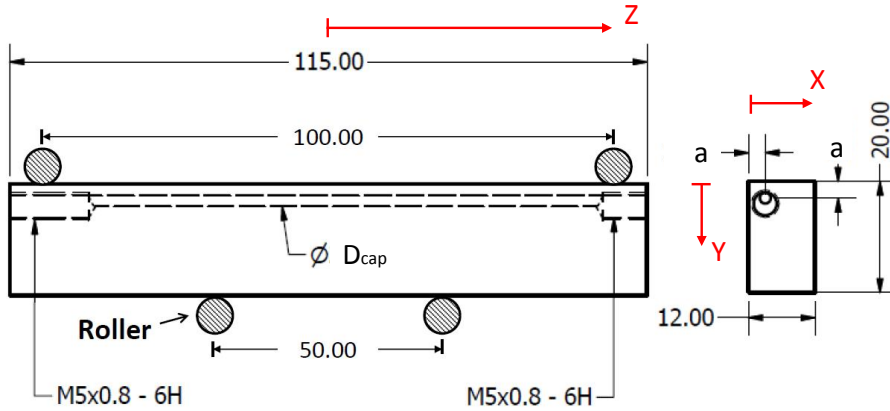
Four point bending fatigue test setup and specimen with straight capillary. Dimensions in millimeter.
